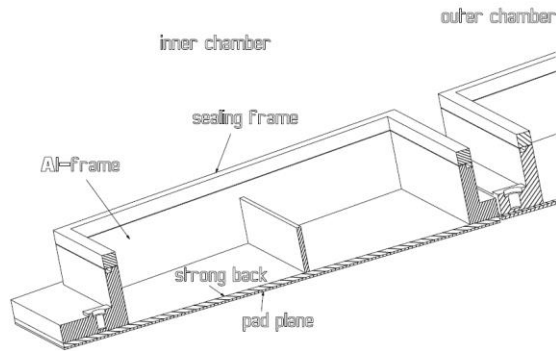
Cross-section through an inner readout chamber. Shown are the aluminium frame with the stiffening ribs, the O-ring groove and threads for the three-point suspension, the pad plane PCB, and the auxiliary maximum deformation is $25 \mu\text{m}$.
